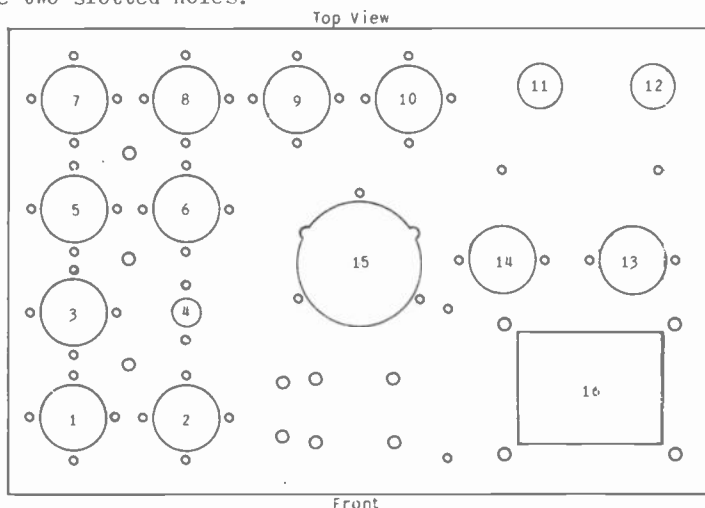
A top view of the metal chassis on which you are going to build all of your experiments. It is a good idea to take a pencil and actually number the holes on your chassis.
